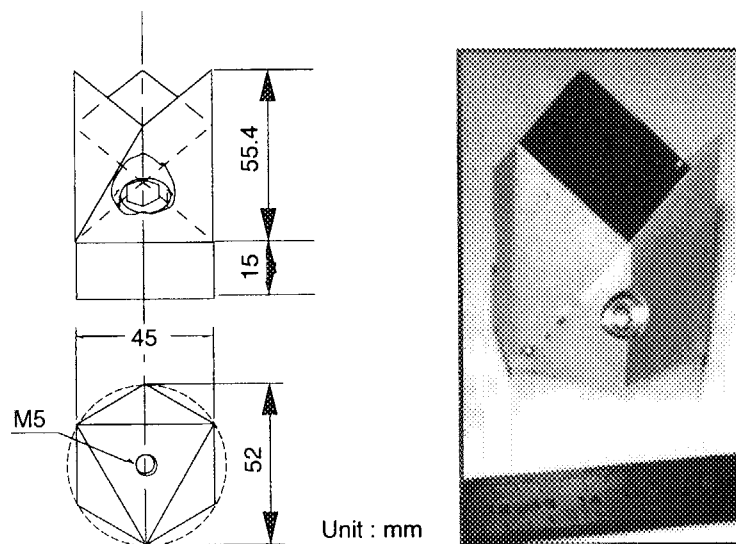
Dimension and photograph of Al-CCR.
